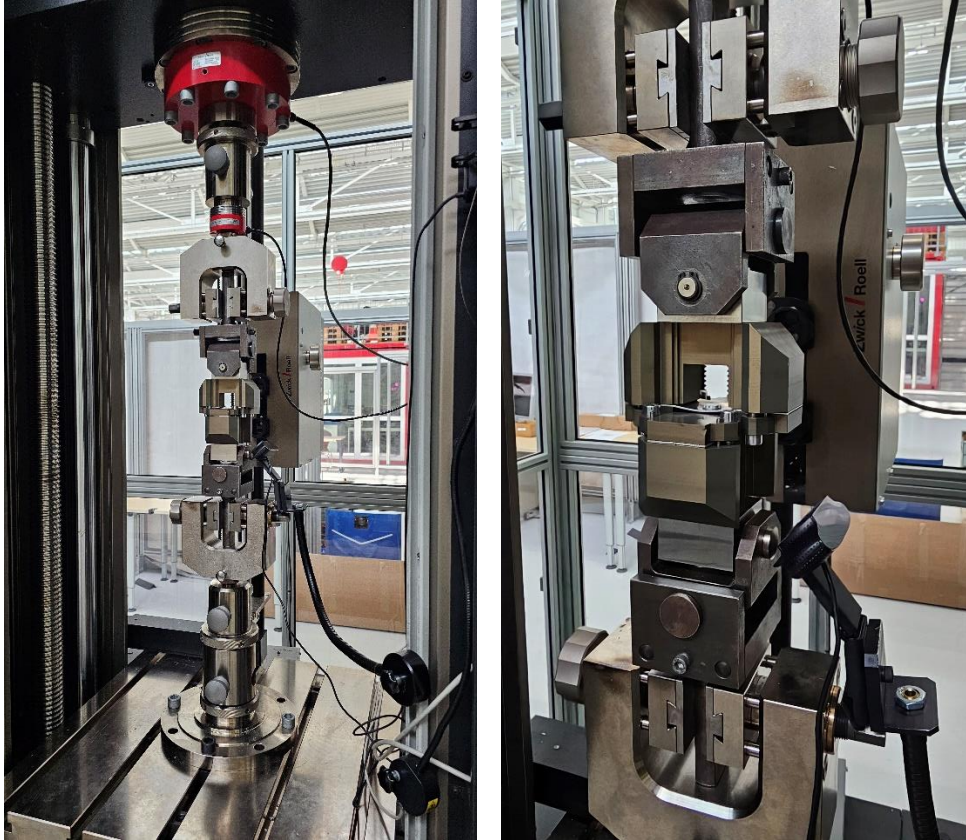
Testing of quasi-static head tensile tests shortly before failure of the joint
